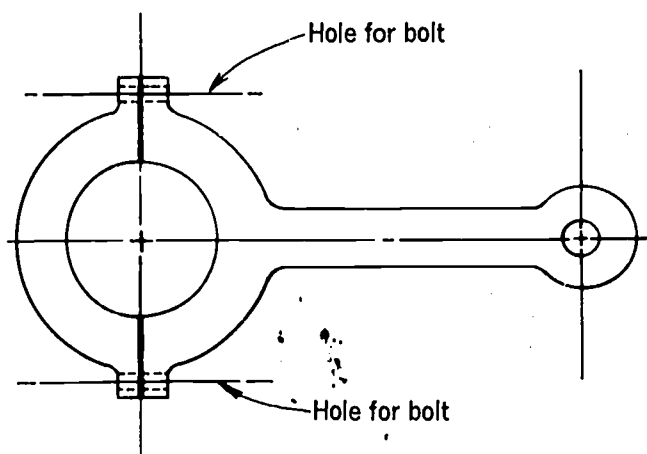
In this front view of a connecting rod, the heavy line shows where the rod will be fractured. The dotted lines show where bolts will be put in after the connecting rod has been assembled with a crankshaft.
